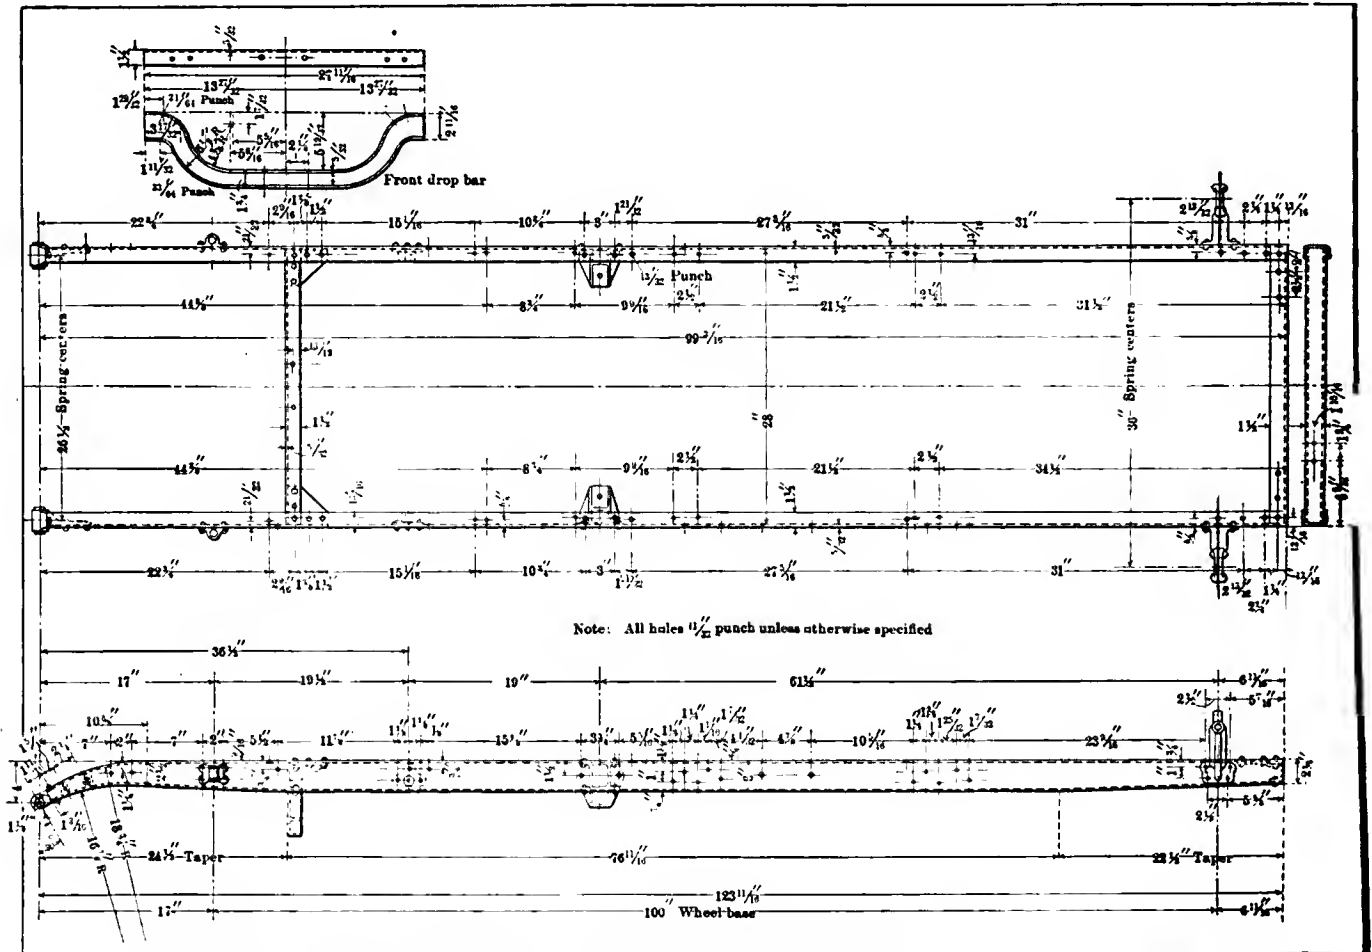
Metzger frame, plan and elevation, with straight front and rear, and hangers for full elliptic rear springs
